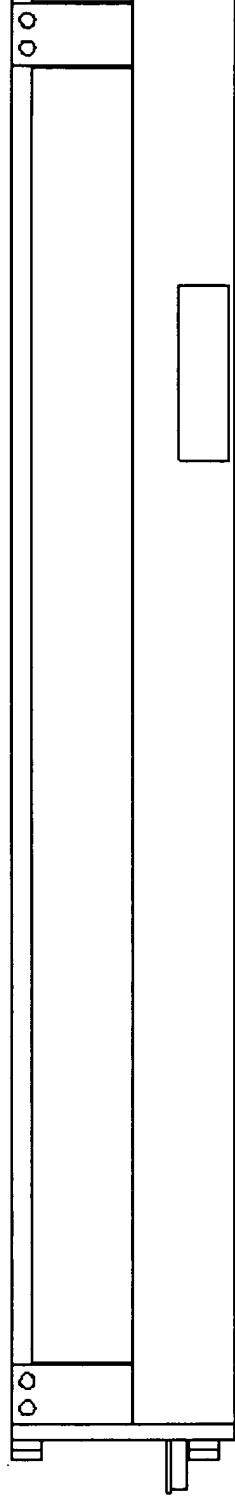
D: Front view of the right end of a floor frame (20 foot high cube collapsible cargo container)
